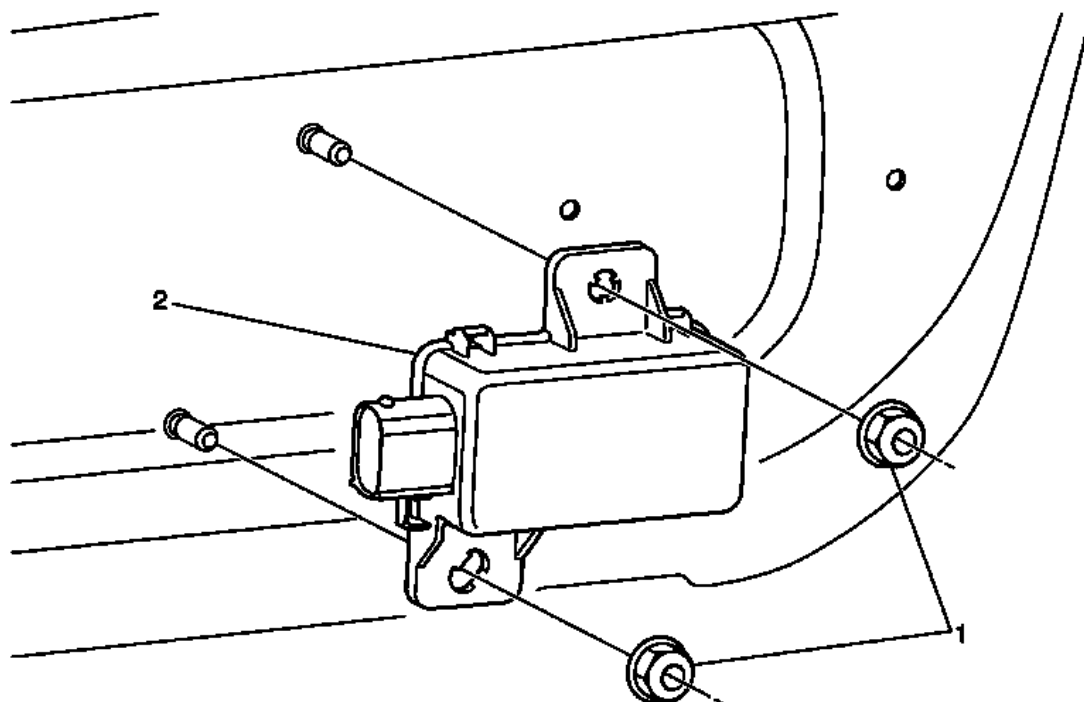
Tire Pressure Indicator Receiver & Fasteners
